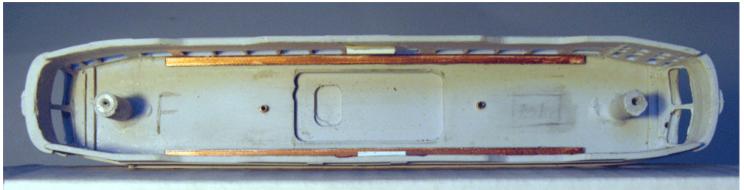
Initial Milled areas in the roof to accommodate motor and flywheel.
